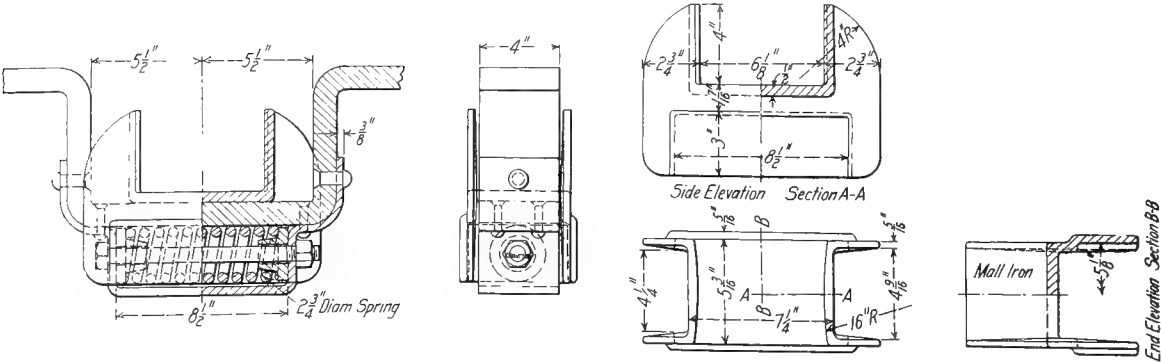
Yerk Centering Device. Waugh Draft Gear Company.
